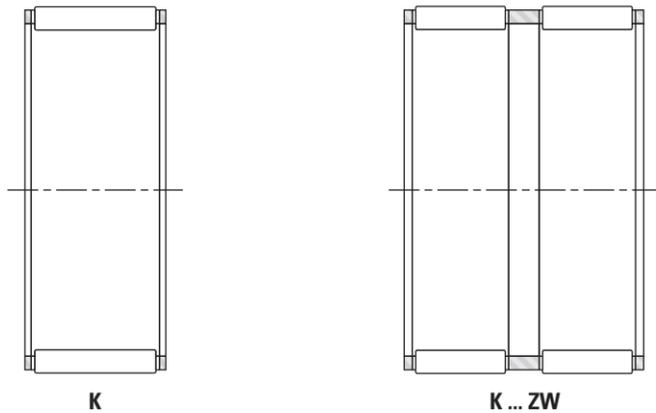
Types of Metric Series Radial Needle Roller and Cage Assemblies
